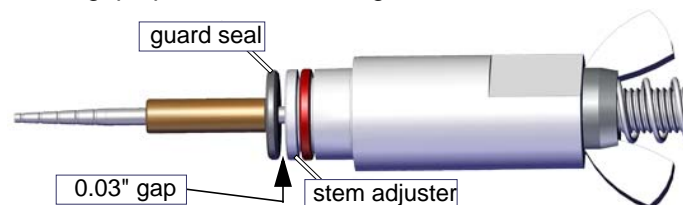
Screw in the adjustment knob to achieve a 0.03" gap between the guard seal and stem adjuster
